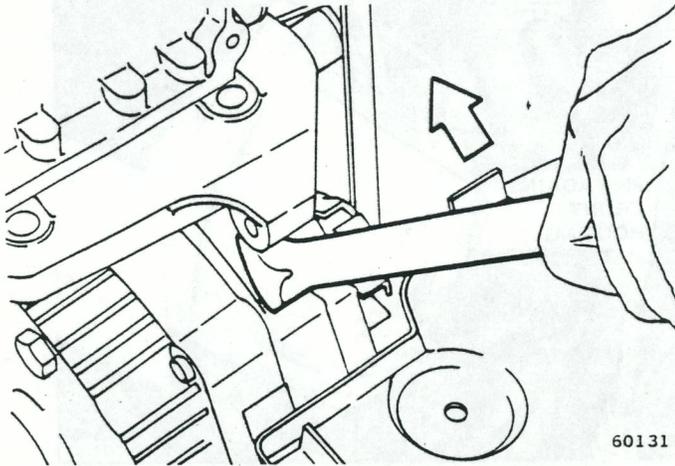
C-20 Eight-Cylinder Engine Alternator Drive Belt Adjustment
